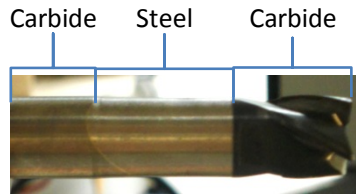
End mill used in configuration 1, 2, 3, 4 and 5.
